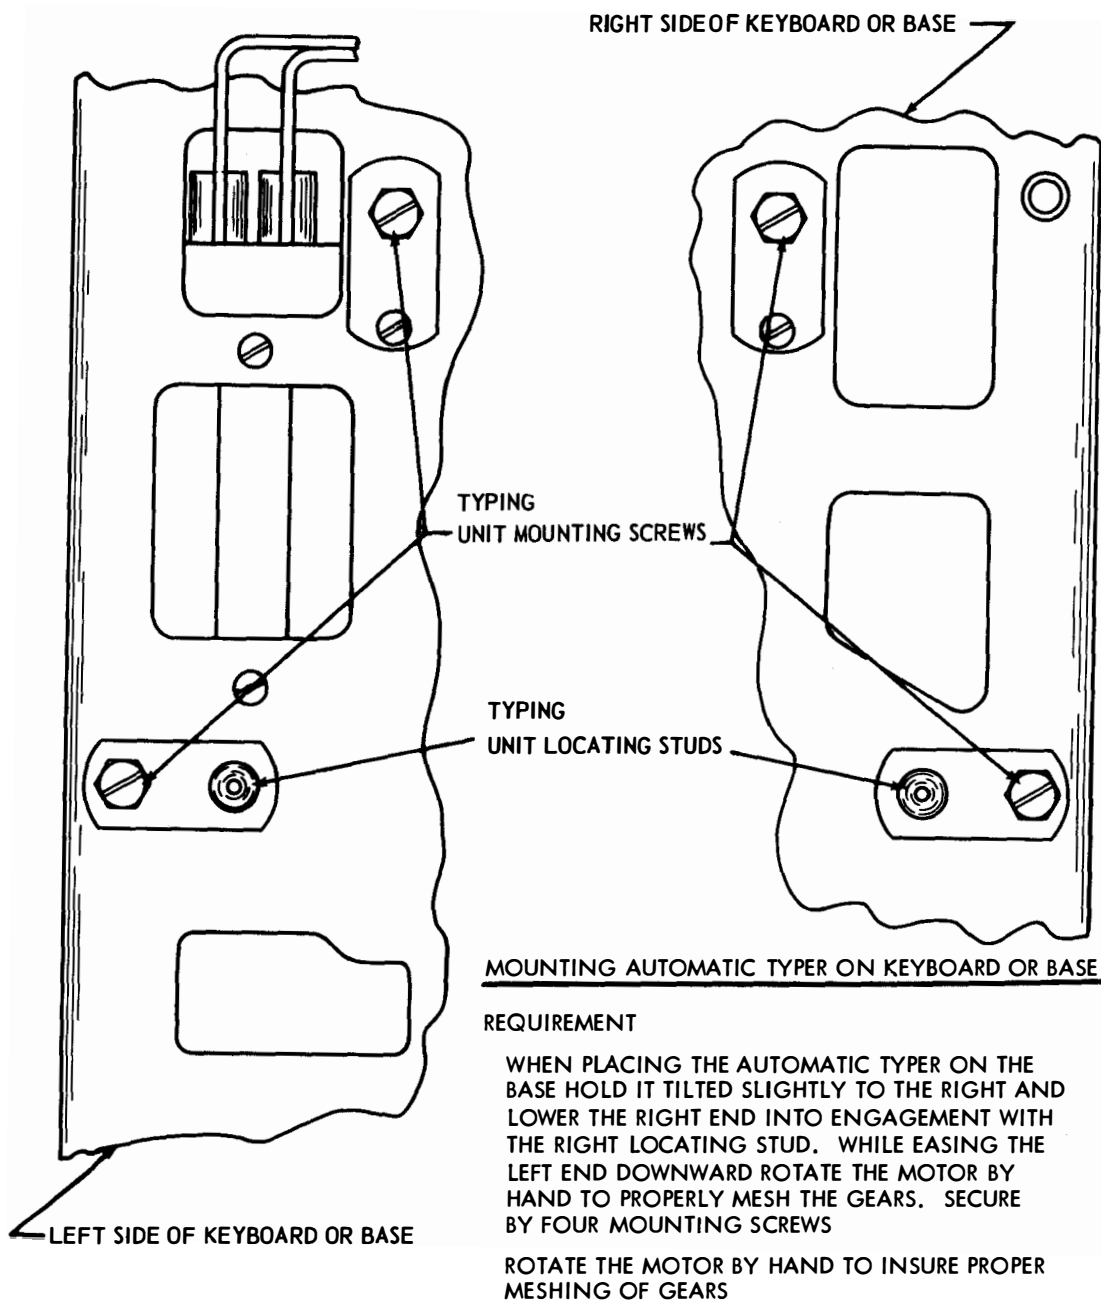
Mounting Automatic Typewriter on Keyboard or Base, Top View
